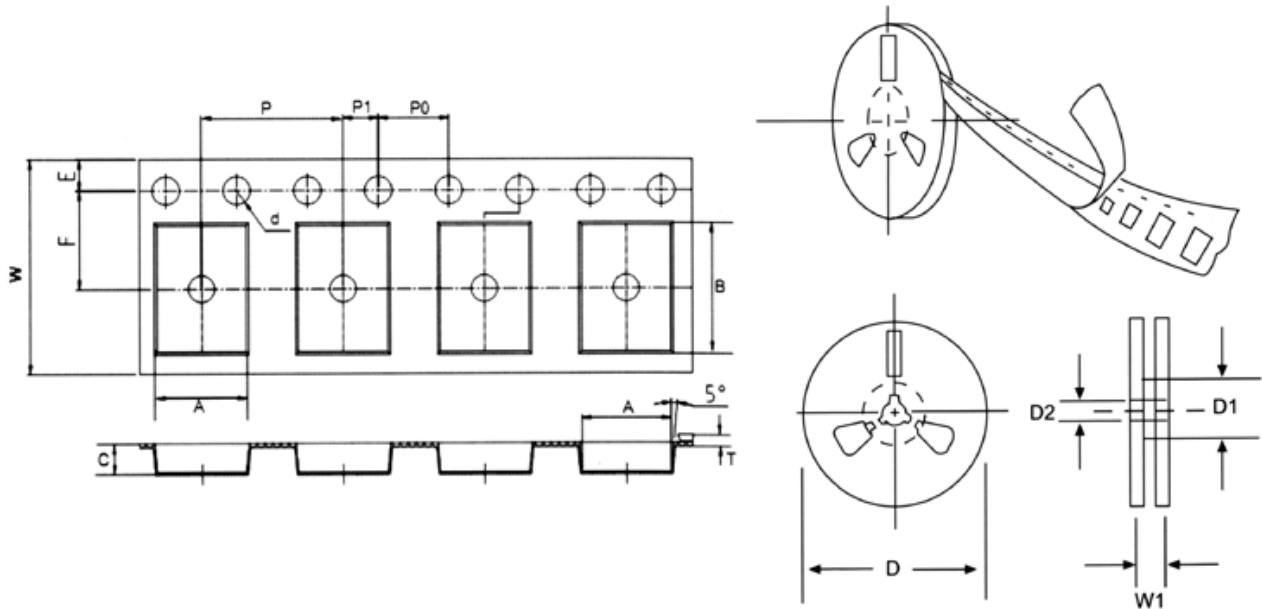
FIG: CONFIGURATION OF SURFACE MOUNTED DEVICES TAPING
